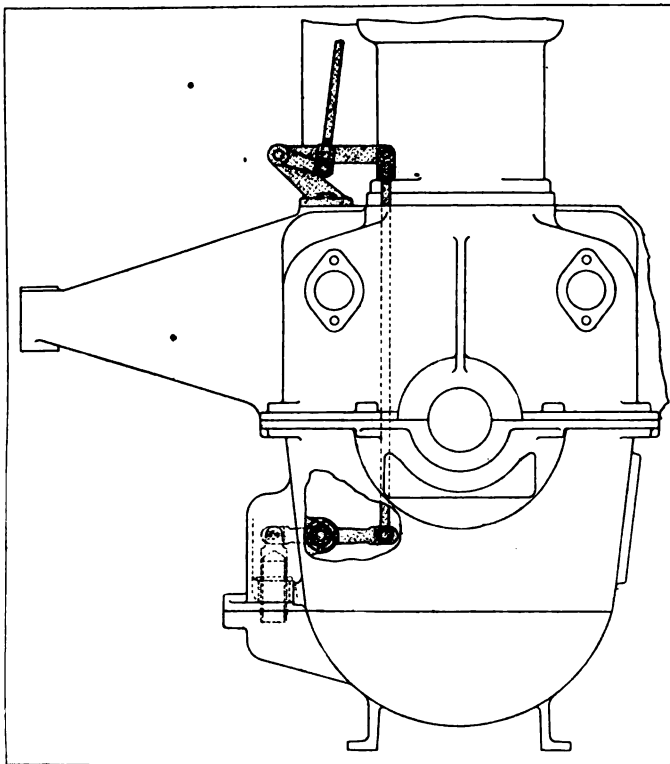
End view of motor driving shaft showing a adjusting mechanism
